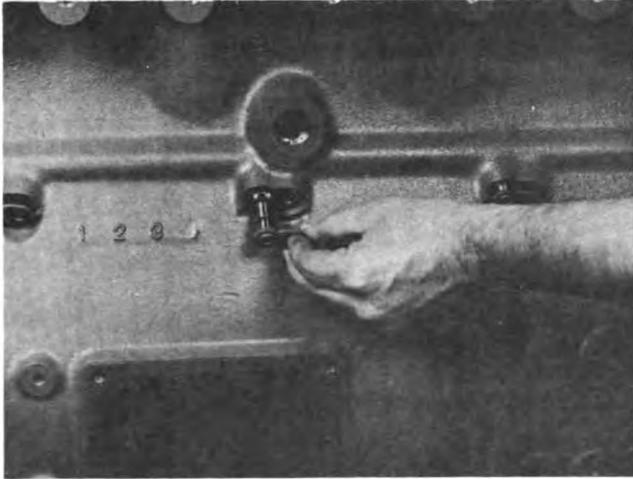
(N100140). Remove The Piston Cooling Nozzle.
